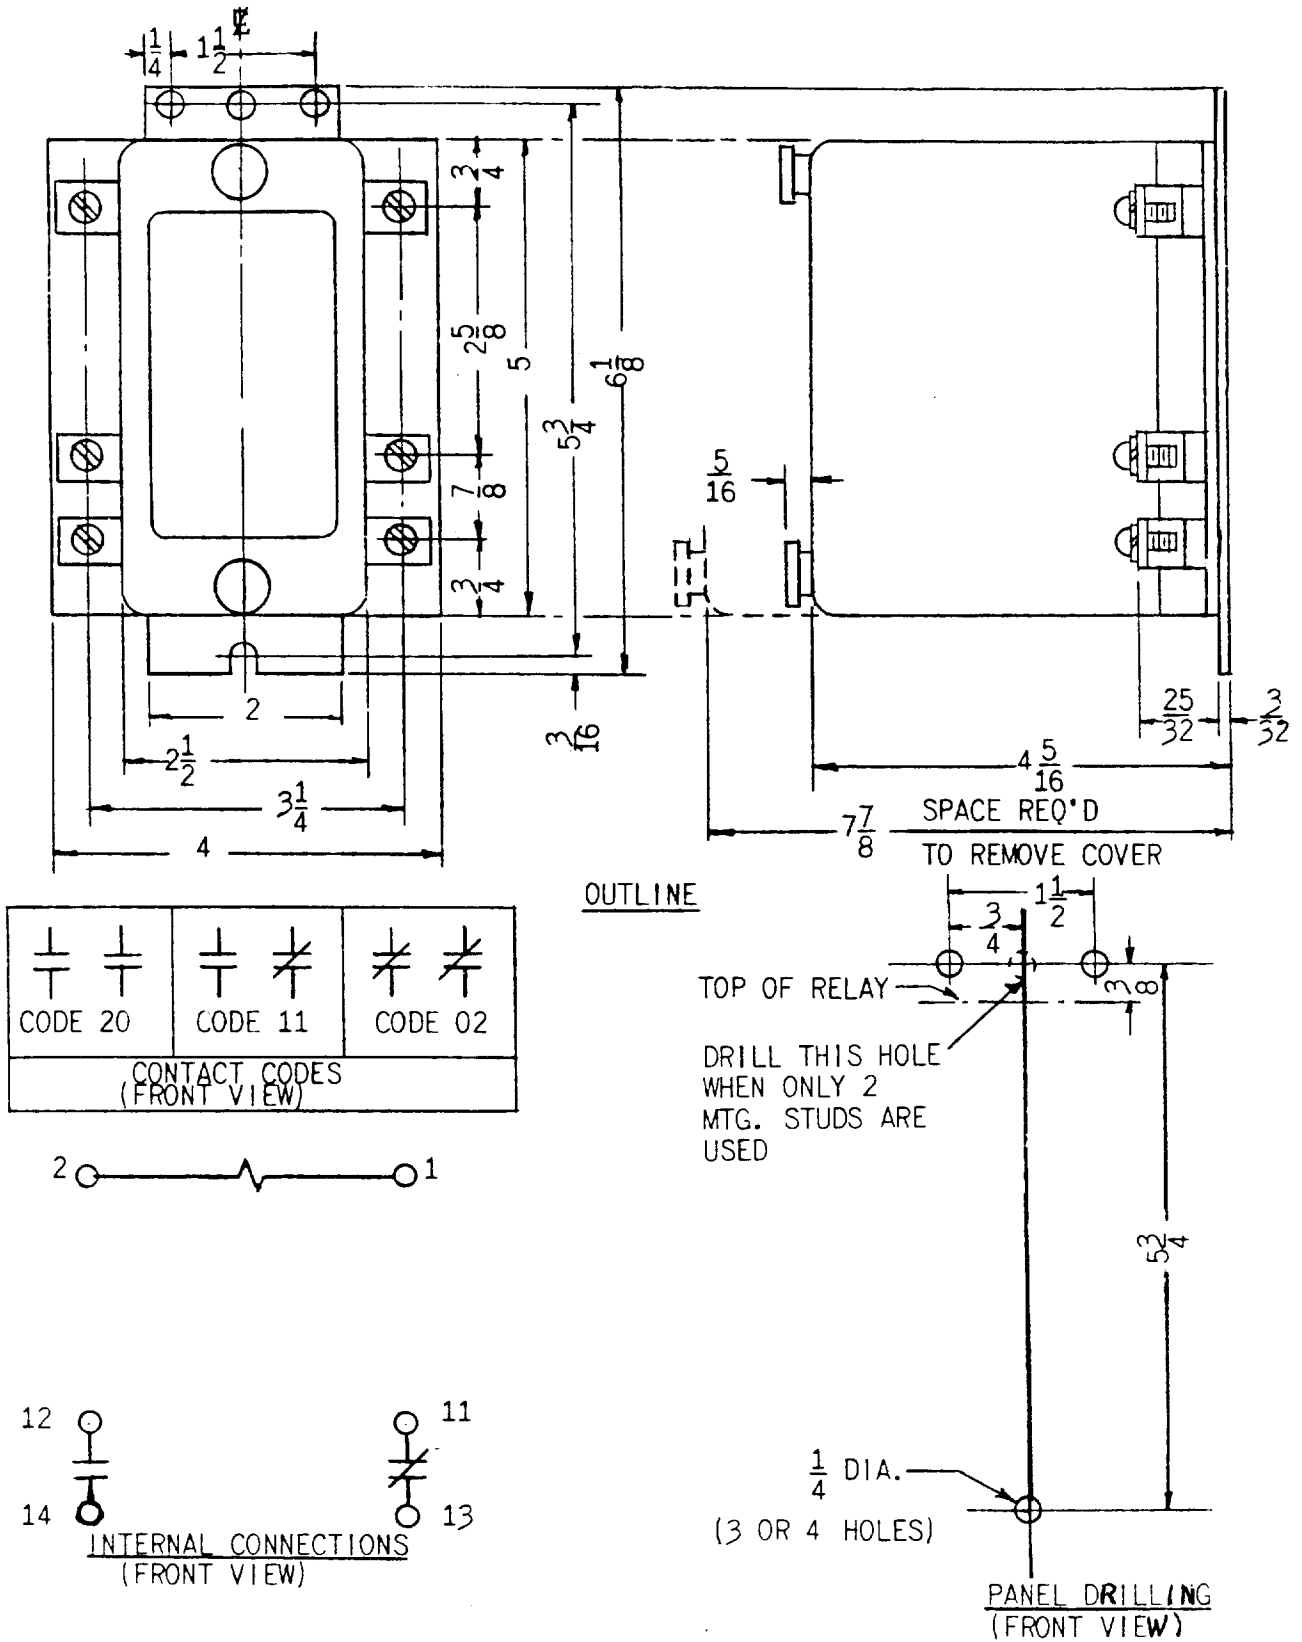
(0165A7526-1) Outline And Panel Drilling Dimensions For Relay Type PJC11BA.
